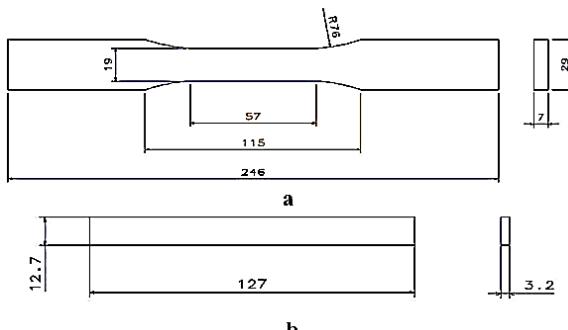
Dimensions of cavities: a) tensile, b) bending test specimens (all in mm)
